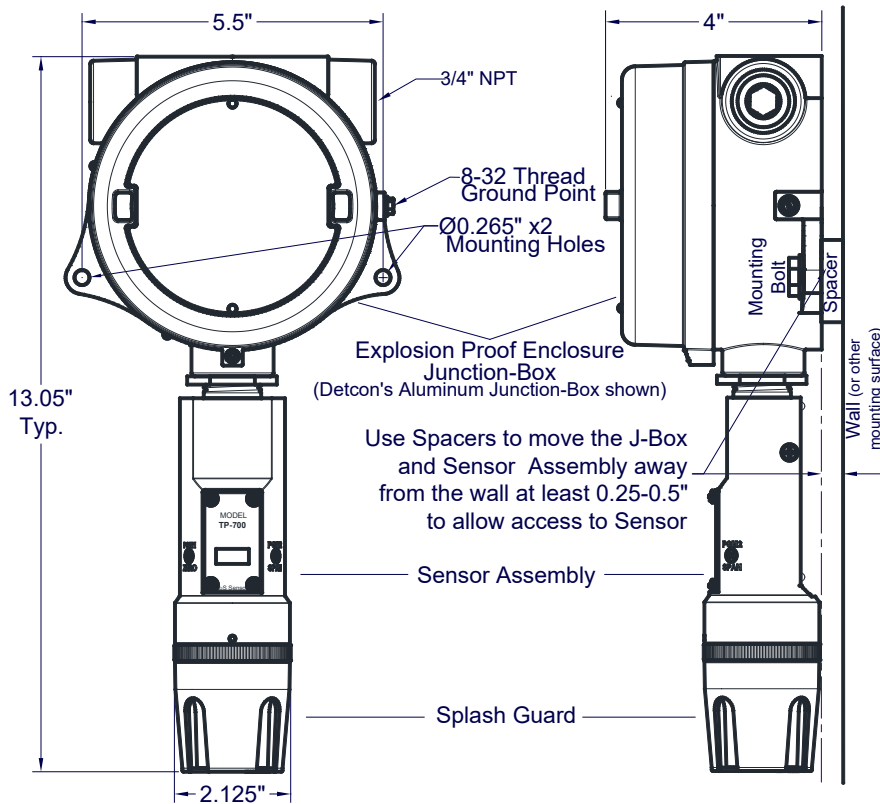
Outline and Mounting Dimensions (Aluminum Junction Box)
